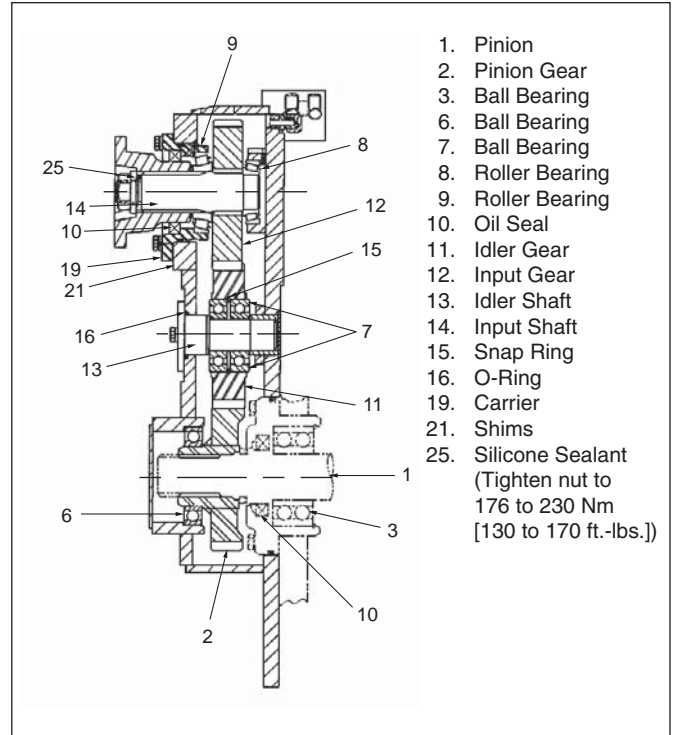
Gearbox on W8L for Komatsu D83-1 & D85ESS-2
